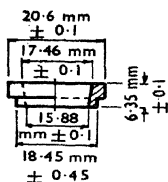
Ring and Ball Test for Pitch—Pitch Ring.
